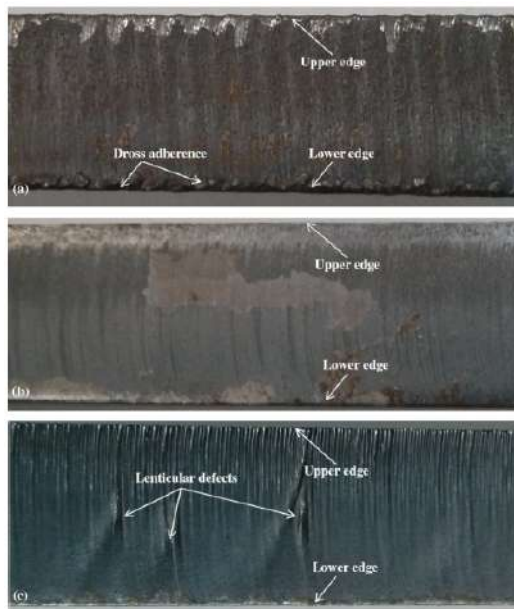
Cut faces of 15 mm thick mild steel: (a) OFC; (b) plasma cutting and (c) laser cutting (Cicero et al., 2016)
